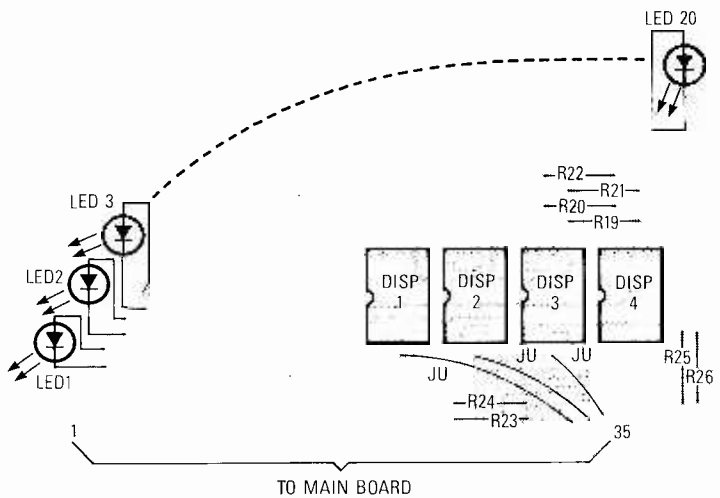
STUFF THE DISPLAY BOARD as shown here. The flat side of each LED should point toward the bottom of the board. The two boards are sandwiched together, and corresponding pads on the boards are connected with short pieces of stiff wire.
